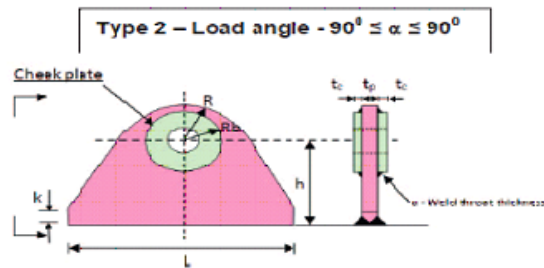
Lifting lug Type 2 geometry - Cheek plates each side
